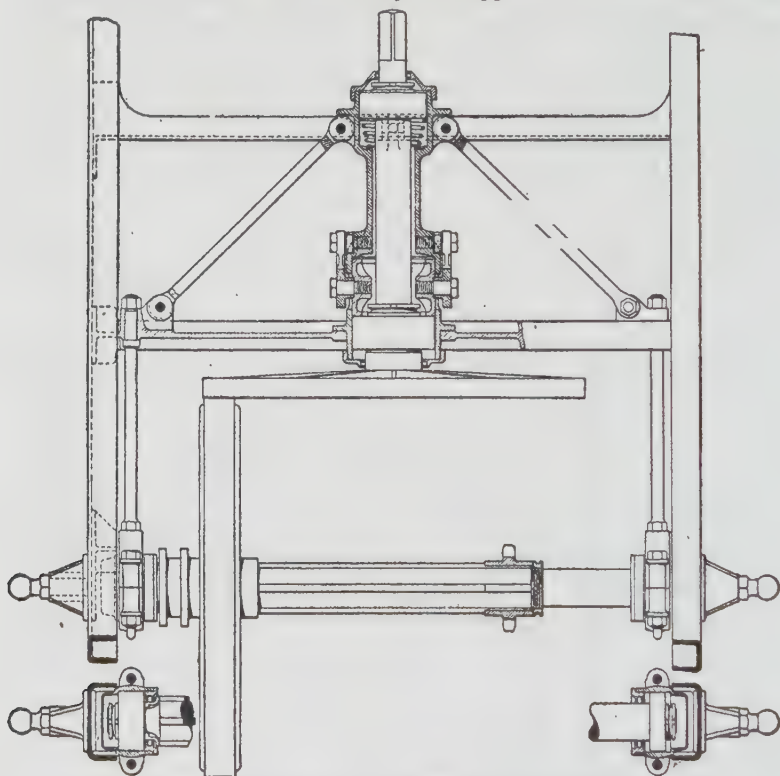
MOUNTING FOR WHEEL AND DISC SHAFTS.
